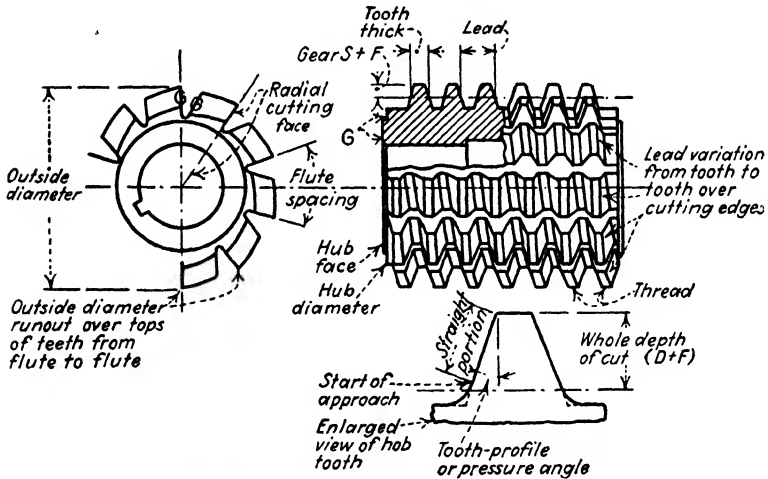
Terms used for parts of single, right-hand-thread ground hob.
